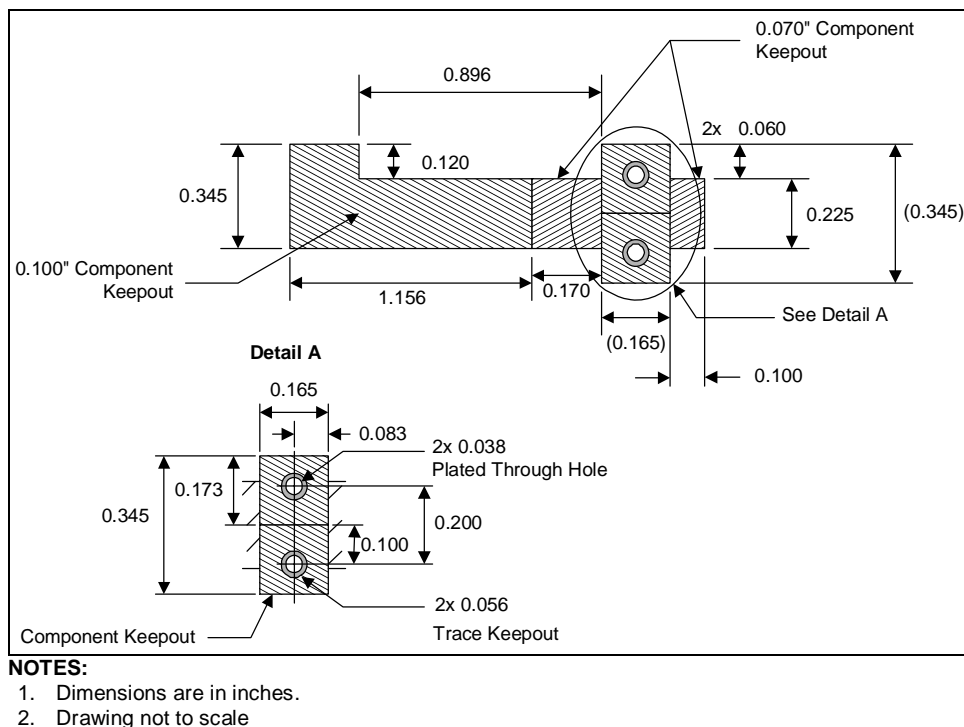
Torsional Clip Heatsink Motherboard Component Keep-out
